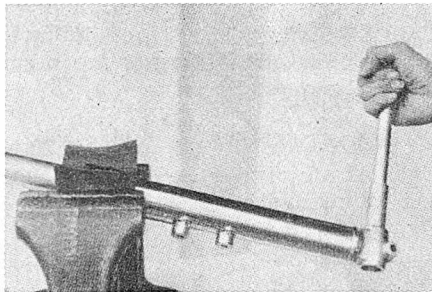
Care should be taken to prevent damage to outer tube nut in vise.
